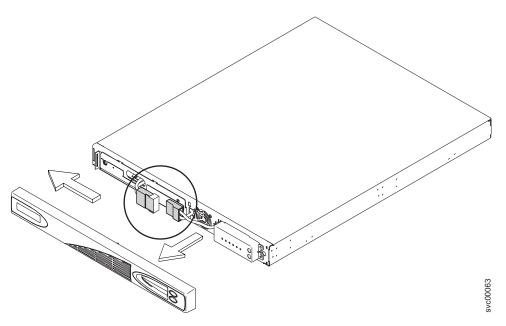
Removing the 2145-1U uninterruptible power supply front panel
